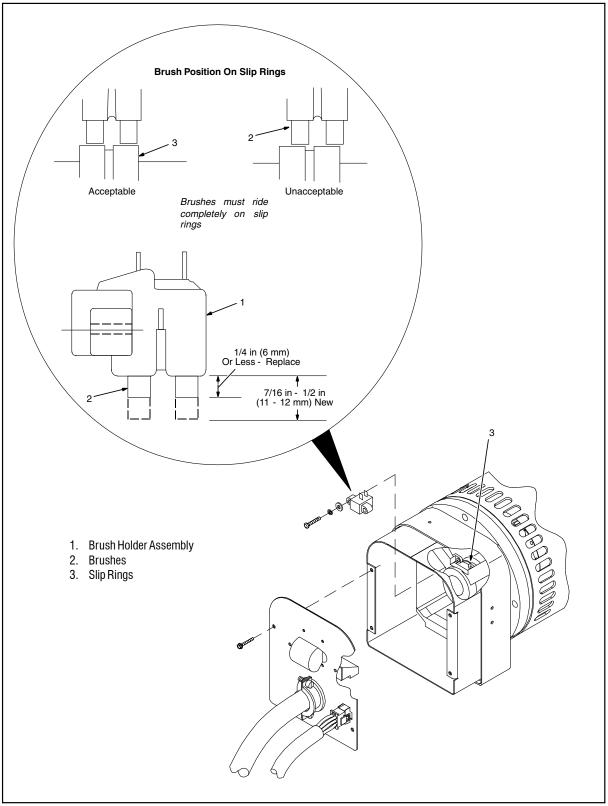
Inspecting Generator Brushes, Replacing Brushes, and Cleaning Slip Rings
